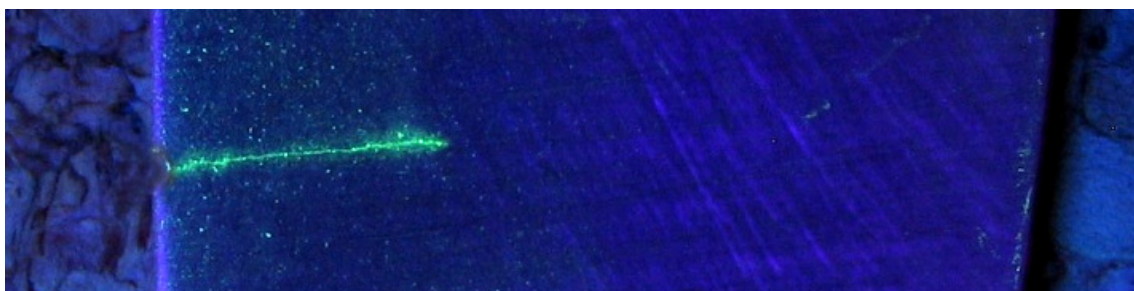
View of fatigue crack in UV light (fluorescent NDE method)
